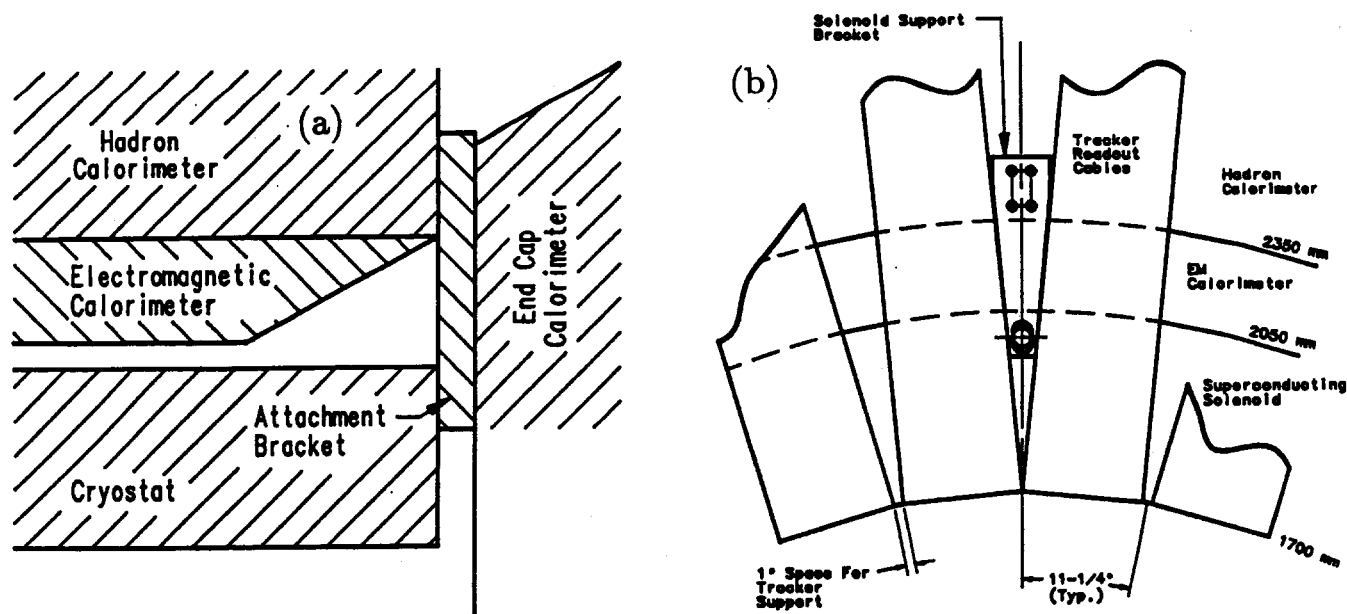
Cryostat attachment to the barrel hadron calorimeter, (a) section view, (b) enlarged end view.
